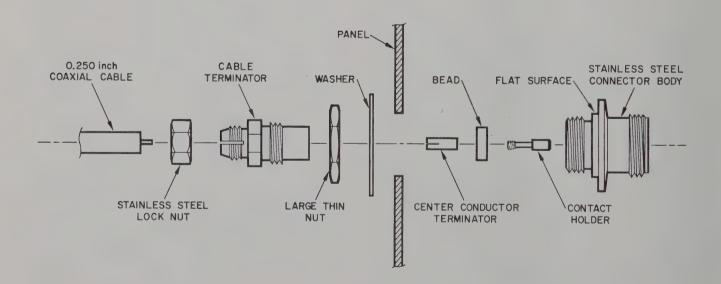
REFERENCE and TEST Channel Output and Coaxial Link Connectors Exploded View
